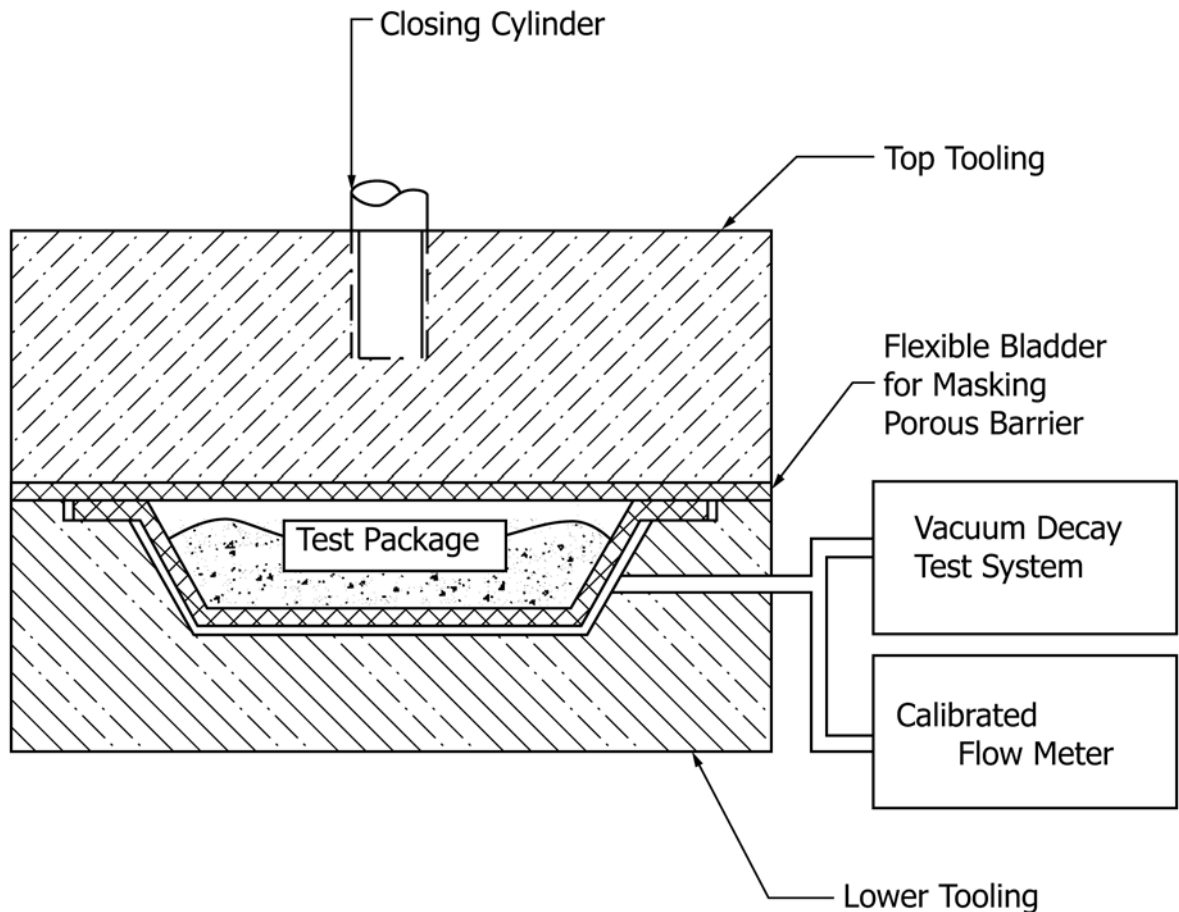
Schematic of Fixture and Porous Barrier Lidded Test Package
